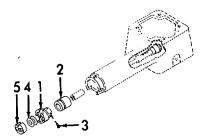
Bobbin and Rotary Sewing Hook Assemblies, Installation.
